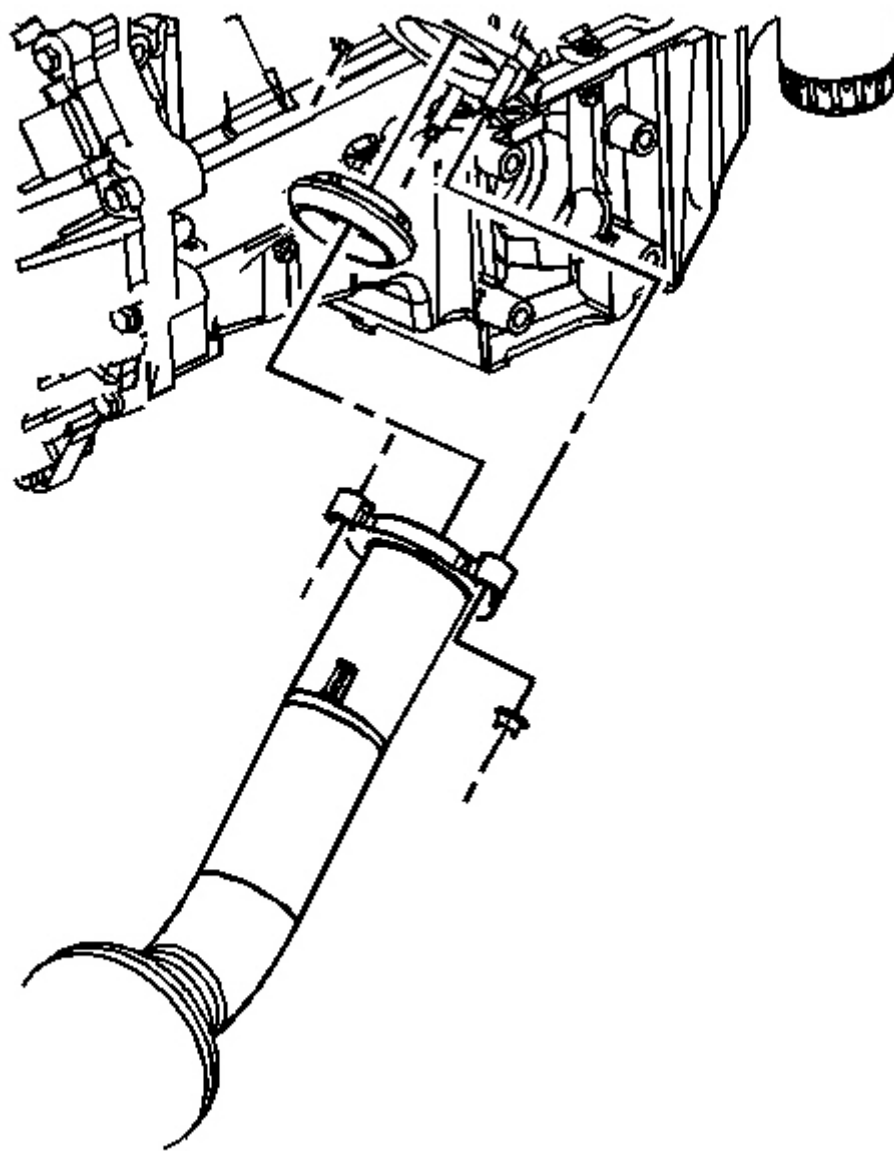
Installing Exhaust Pipe To Manifold With Seal - 4.2L
